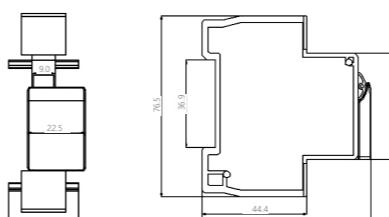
LMI-13 mechanical interlock appearance and installation dimension
